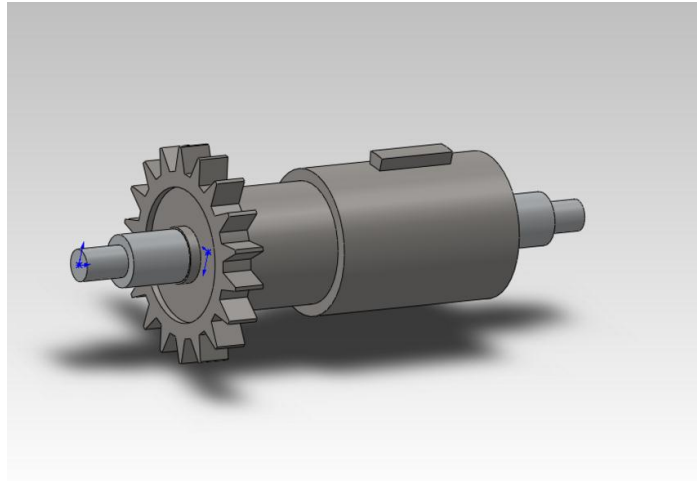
Solidworks view of the great wheel winding stem of the gear train
